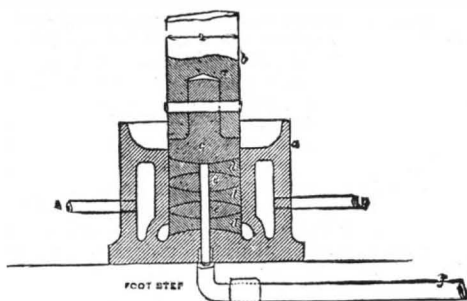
METHOD OF LUBRICATING FOOT STEP.
